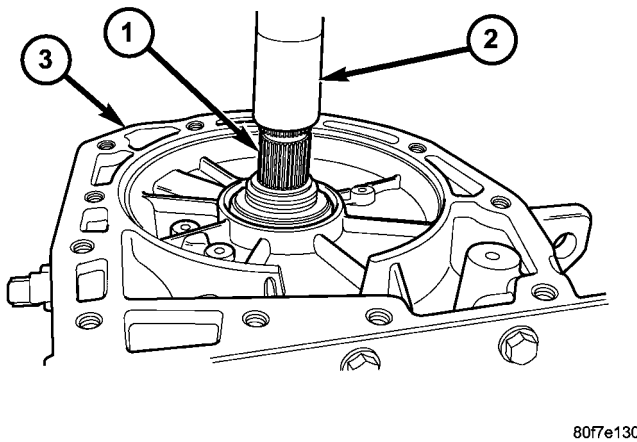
Use Arbor Press to Remove Output Shaft from Case
